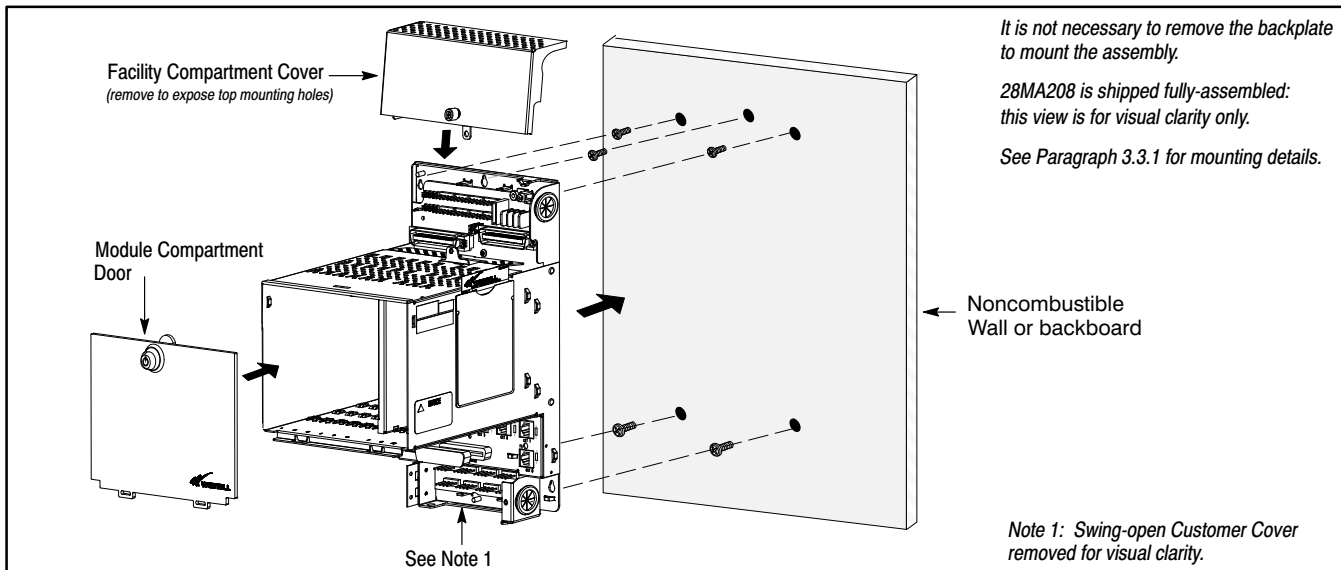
Exploded View, Showing Compartments Doors/Covers Removed and Showing Mounting Hole Locations
